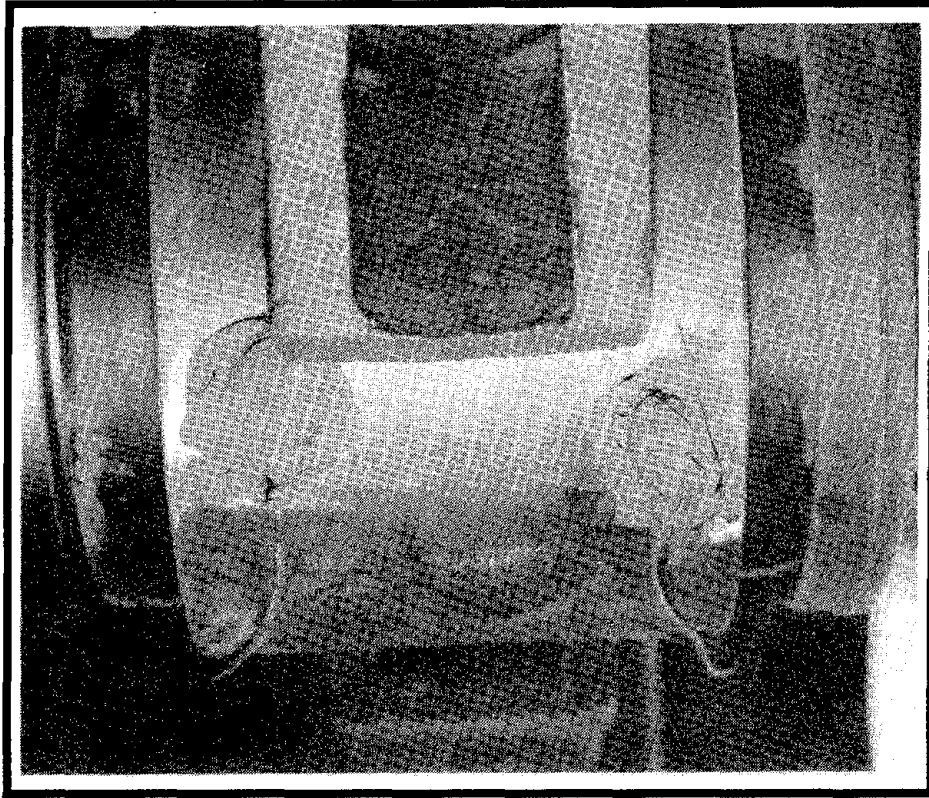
Pre-Test Axle Journal Condition -- Bearing B
